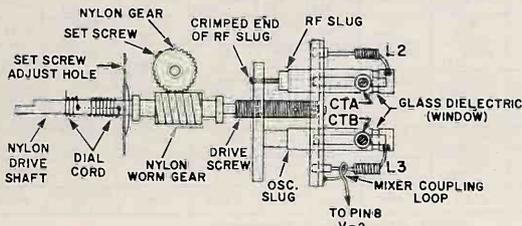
BOTTOM VIEW OF TUNER (IN MAX. CW POSITION WITH SHIELD REMOVED)
